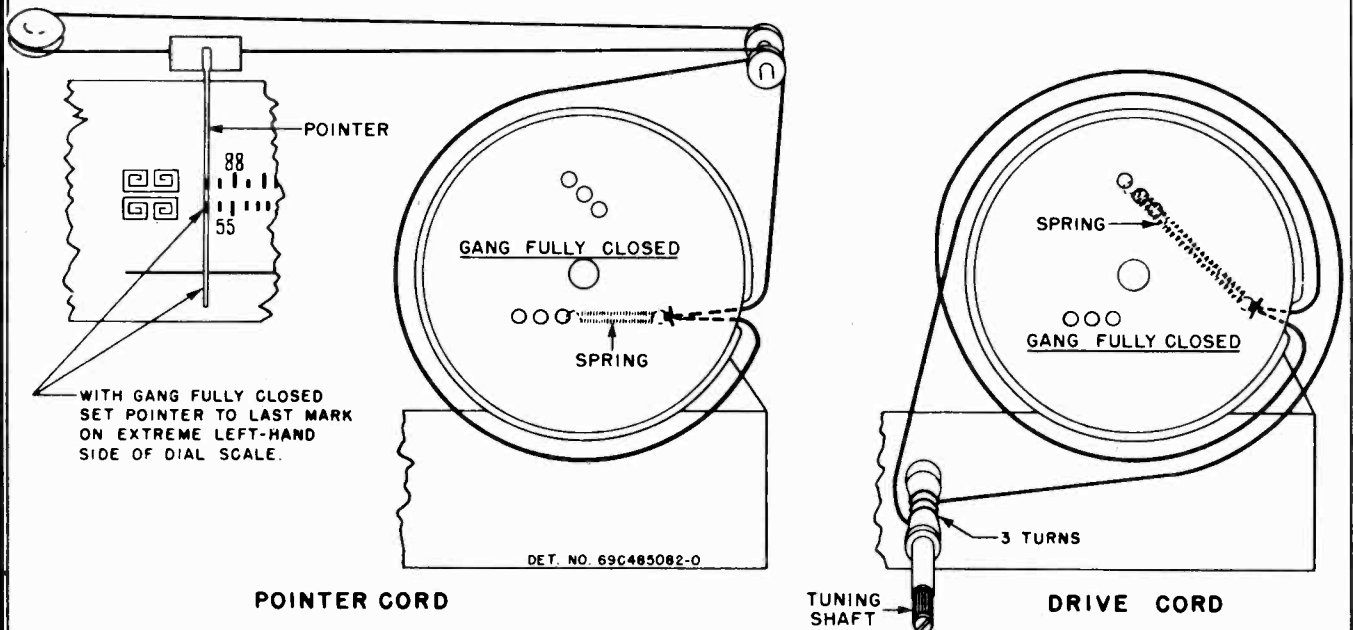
CHASSIS HS-128 & HS-132 STRING DRIVE DETAIL
